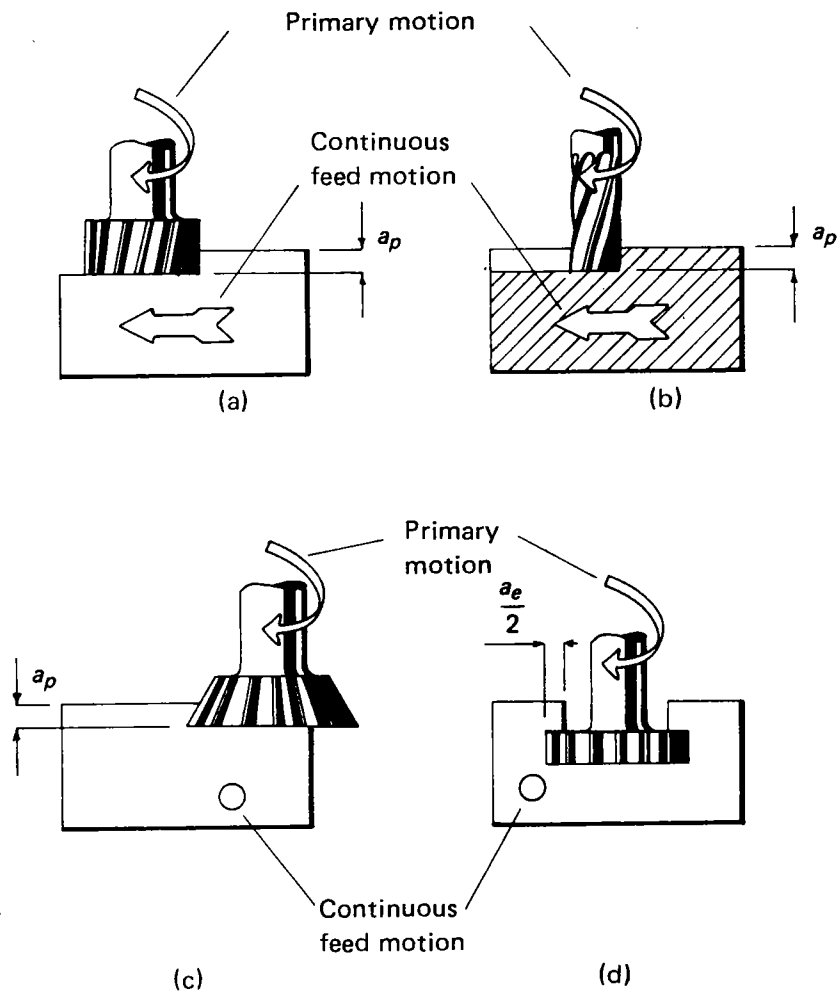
Some vertical-milling-machine operations. (a) Horizontal surface; (b) slot; (c) dovetail; (d) T slot.
